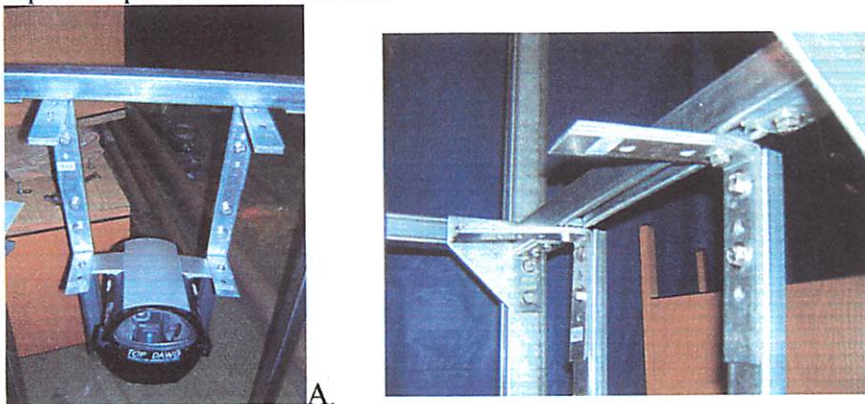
Camera housing attachment. A. is the entire attachment and assembly from the aft portion of the camera. Note the L-shape hangers. B. Close-up view of the L-shape hangers holding the two 2 ft Unistrut sections.
